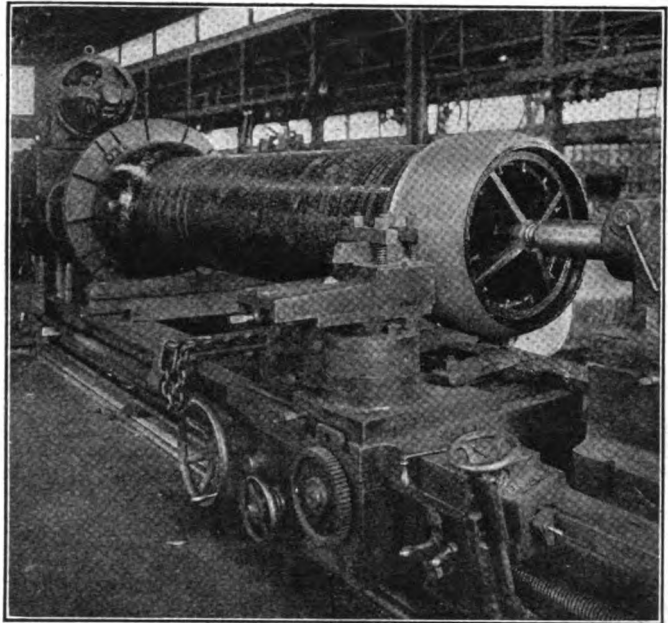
MACHINING THE SPIGOT END OF A 30-INCH PIPE
